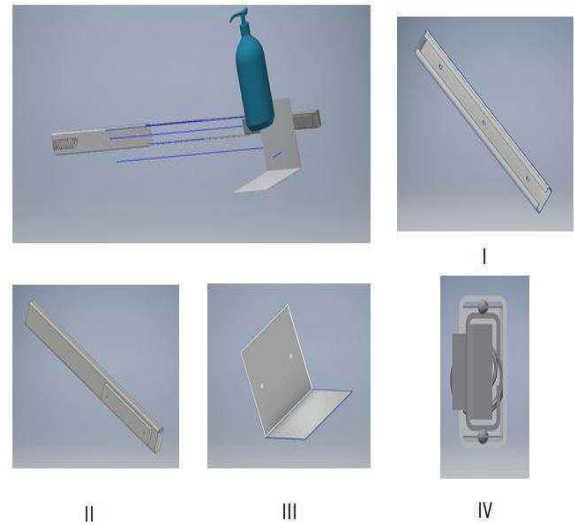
Main components of the Door-Mounted Hand Sanitizer Dispenser
